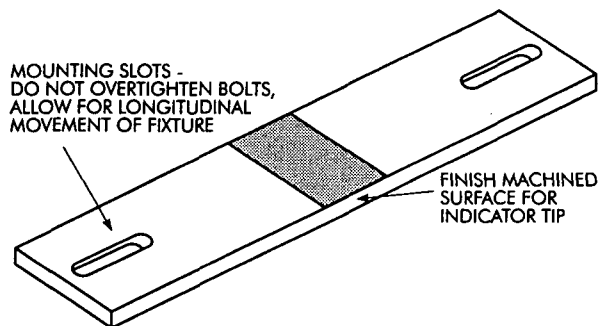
INDICATOR FIXTURE FOR SHELL AXIAL RUNOUT
